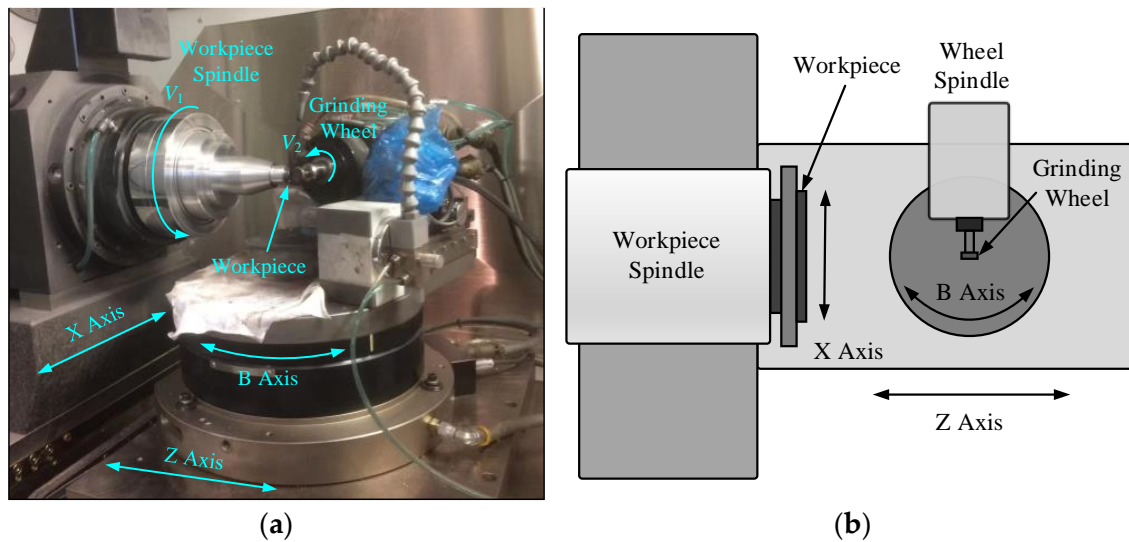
Configurations of 4-axis ultra-precision grinding machine: (a) ultra-precision machine tool for grinding experiments; (b) structural layout of the grinding machine.
